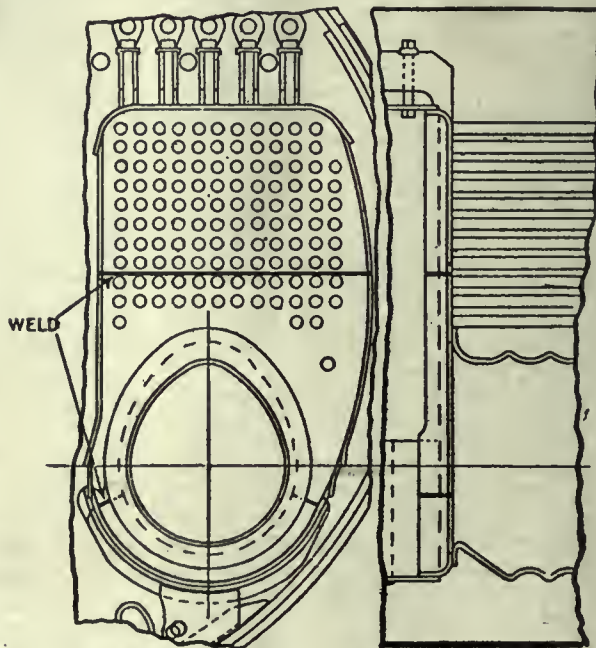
NEW LOWER HALF TUBE PLATE WELDED IN.
